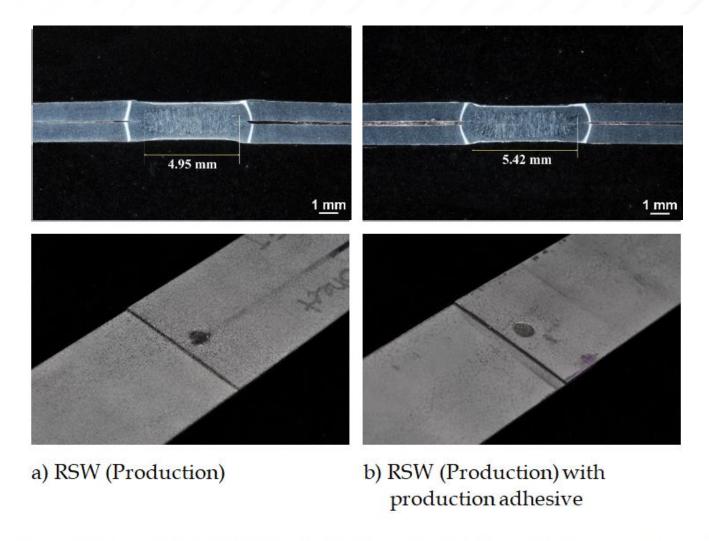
(a-b). 1.0 mm MS1500 EG RSW (Production) typical joint and cross-section photos
